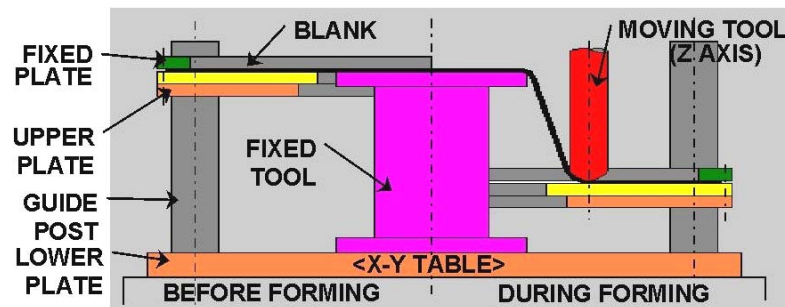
Schematic of the Amino Corporation sheet metal former, a dieless NC forming process.
